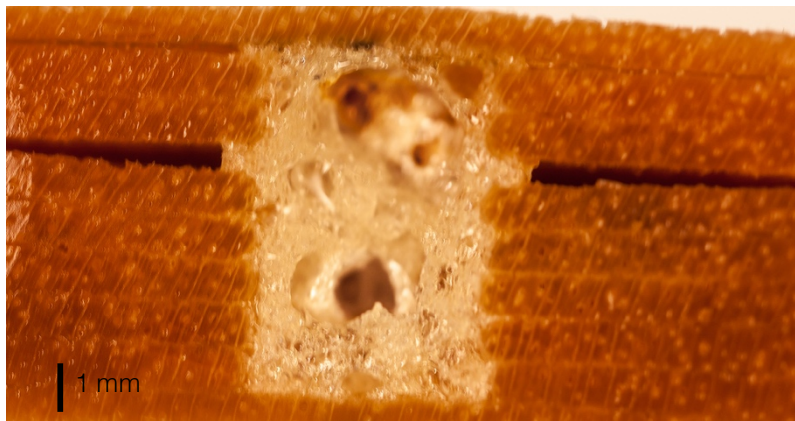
Macro-photograph of a cross-section of a perforated section of a model wood composite containing a 3 mm diameter adhesive Z-connection. Note the 3 mm diameter hole is not completely filled with adhesive and voids are present in the adhesive Z-connection
